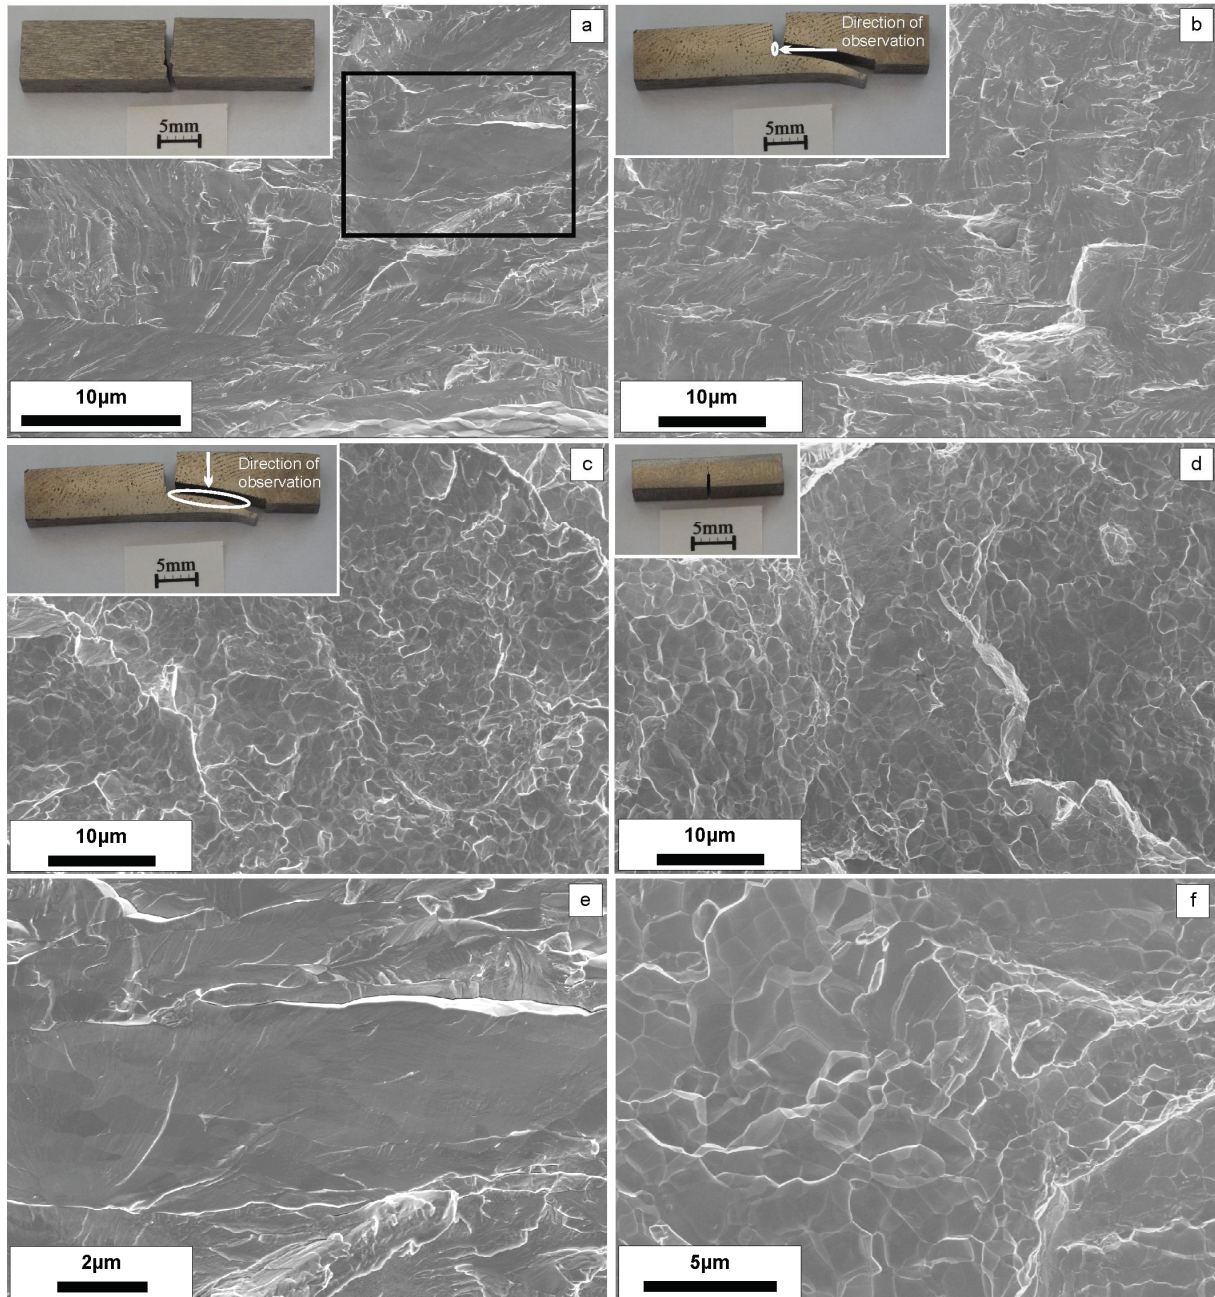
Illustration of the fracture surfaces taken on 3PB specimens made of W-5Ta. a) tested at RT, crack propagation in the forging direction; b) tested at 600 °C, crack propagation in forging direction, transcrystalline fracture for small crack extension. (c) the same specimen as b) but micrograph was taken in the specimen's midsection, where the crack had deviated from the forging direction, resulting in pure intercrystalline fracture. d) specimen fractured at RT, crack perpendicular to forging direction, again pure intercrystalline fracture is observed. e) shows the transcrystalline fracture within the region highlighted with a black square in a) in greater detail. f) is a higher magnified picture from the sample shown in d). In both details, the subgrain structure is visible.
